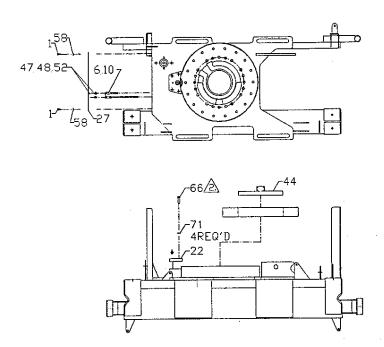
BASE & 4.88m OUTRIGGER ASSEMBLY (41710040)
